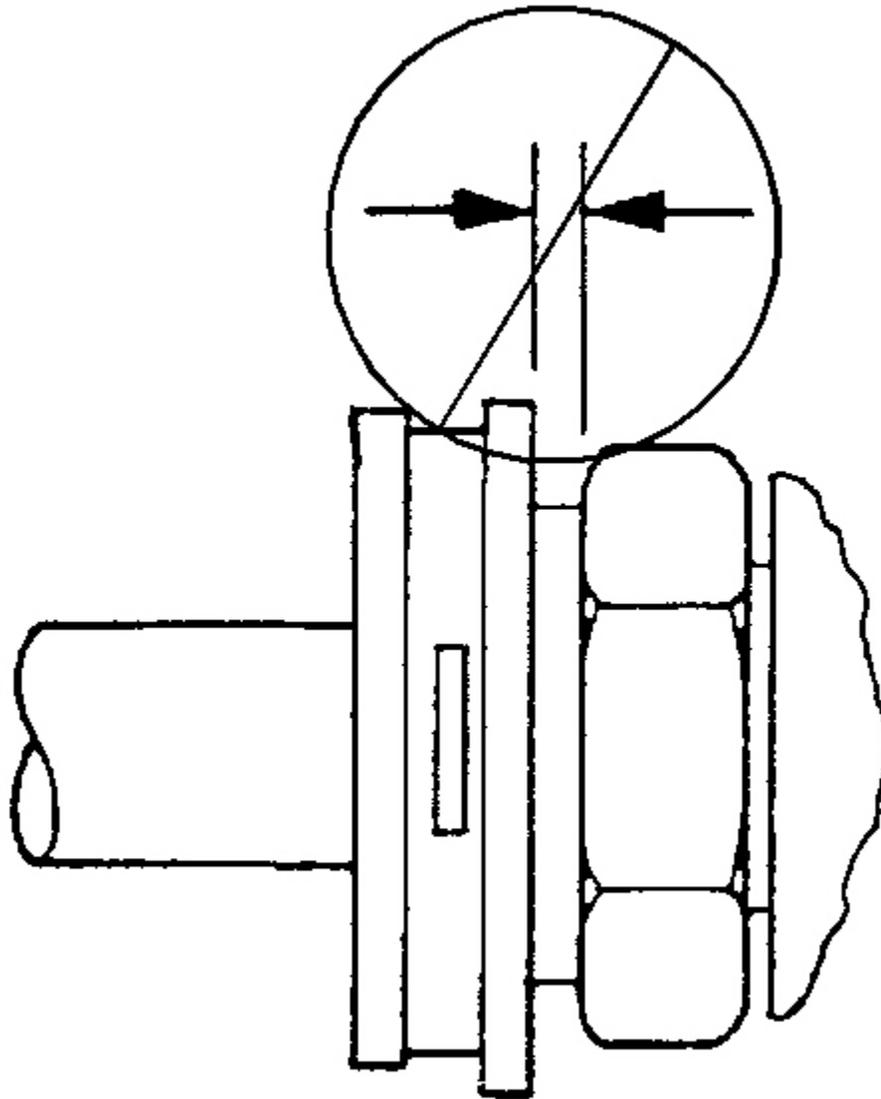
Ensuring That No Gap Is Present Between Cap & Fitting
